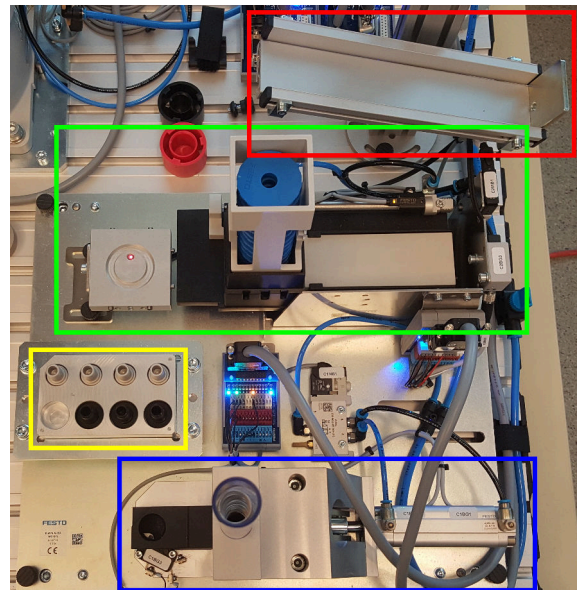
Robot assembly module: Output chute, Cap stack, Piston storage, Spring storage
